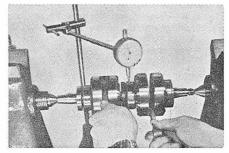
Method of measuring eccentricity with crankshaft mounted between lathe centers using a dial indicator.
